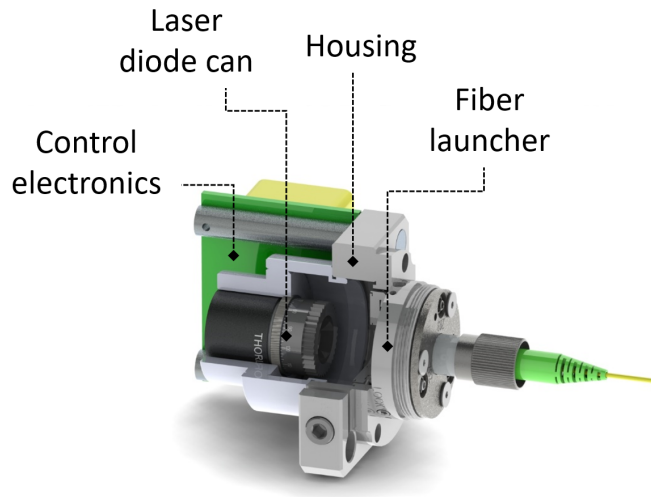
This figure shows a cut out of the laser module design used for the 375 nm laser package. The total package dimensions with control board attached are 60 x 41 x 51 mm. Original design created by Dr Gonzalvo.
